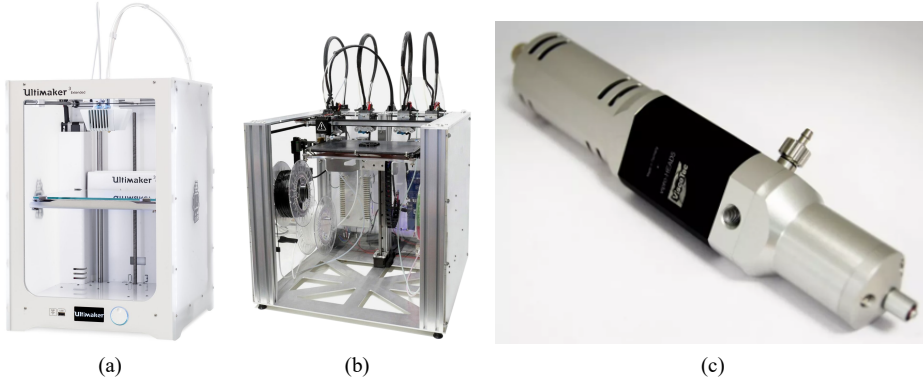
Manufacturing equipment utilized in this work. (a) Ultimaker 3, (b) custom built printing system based on the E3D Toolchanger concept with four independent tools, (c) ViproHead micro-dispensing print head for dispensing viscous inks and pastes.
